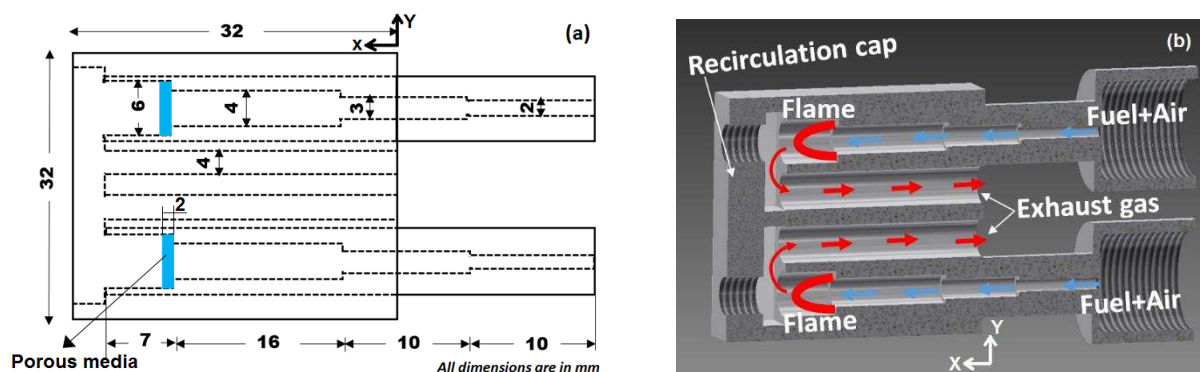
(a) Dimensional details (b) Cross-section view of the dual microcombustor configuration.
